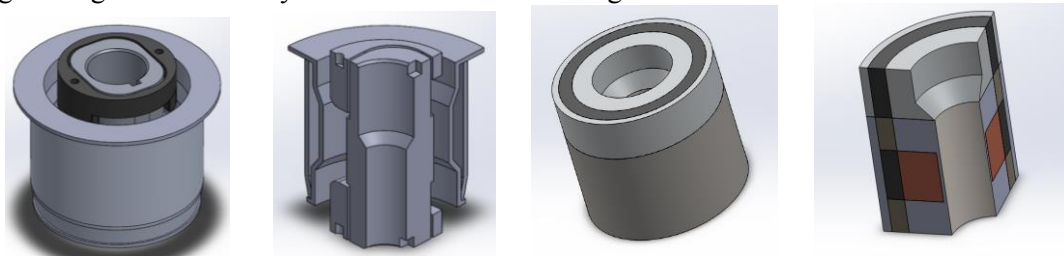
3D model of cross member front and rear bush quarter section and assembly
